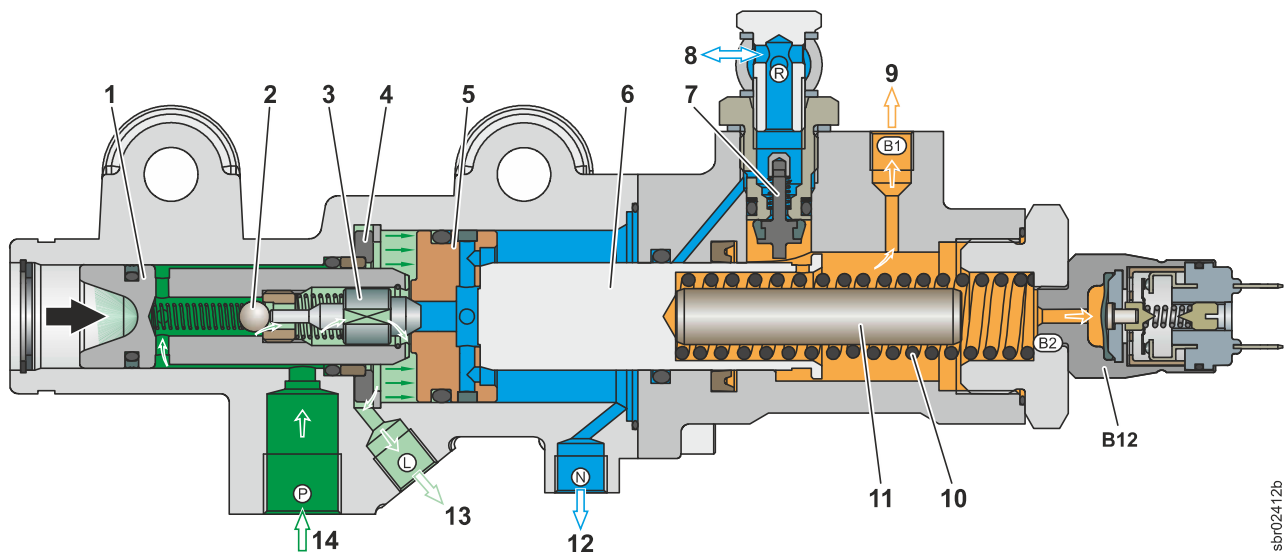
Service brake pressure control piston and main service brake cylinder; sectional view
